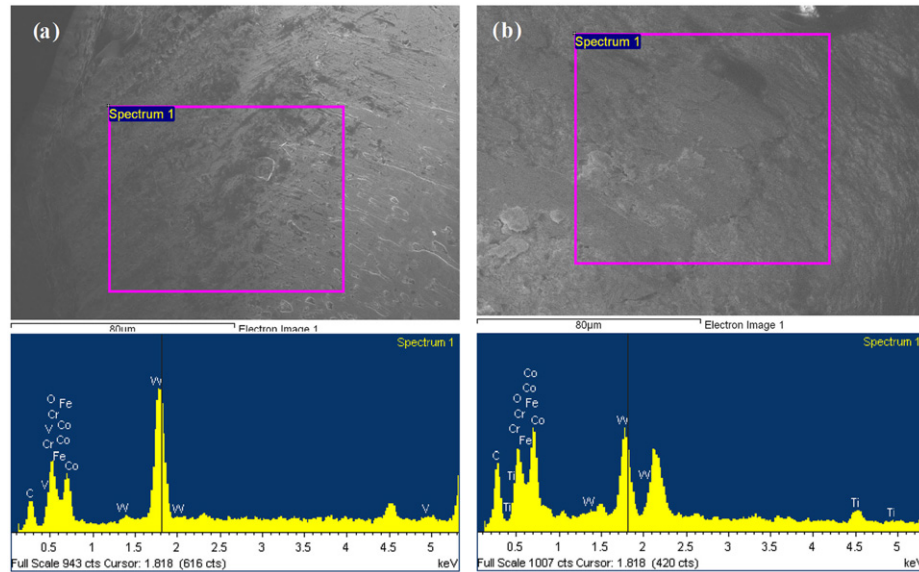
EDS spectrum of the worn rake face of both inserts when cutting test finished at the cutting speed of 176 mm/r. (a) Ultrafine insert and (b) conventional insert.
